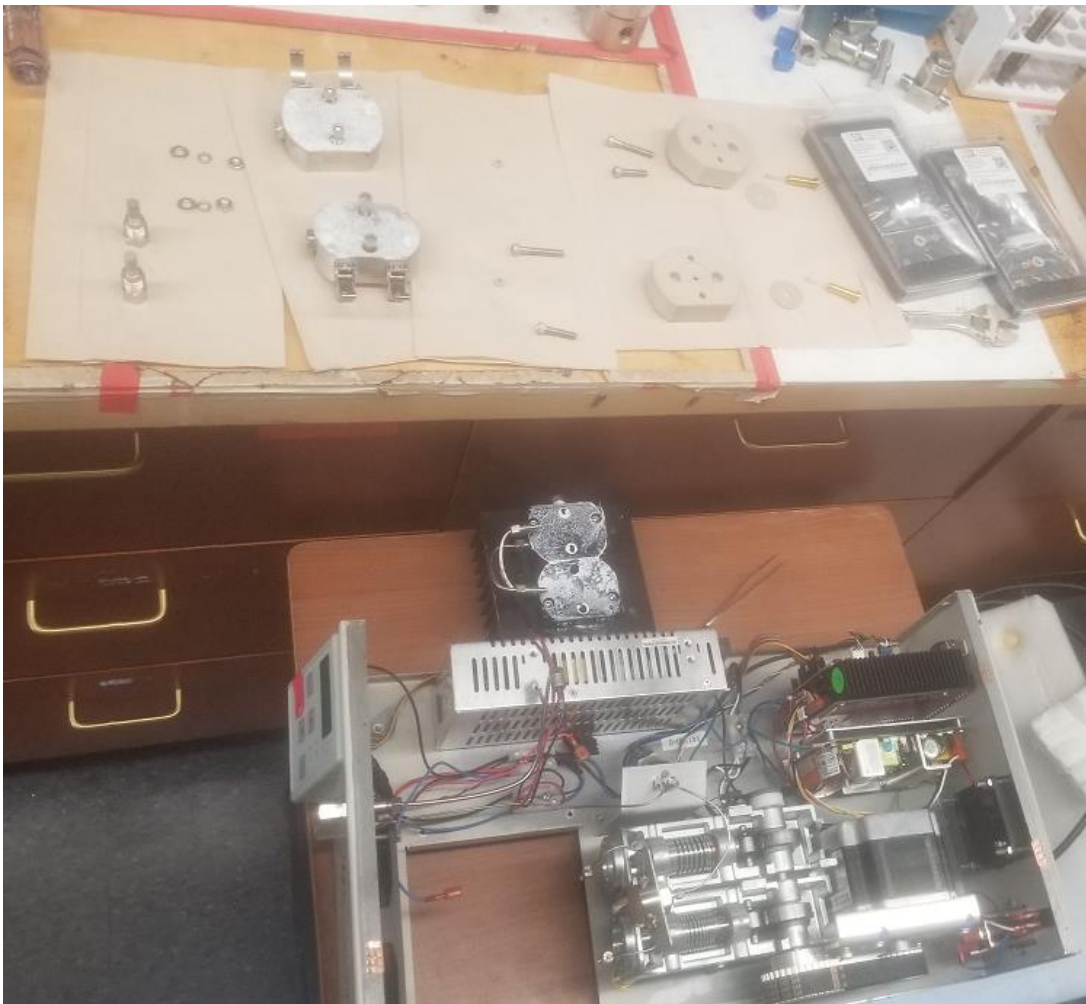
Photograph of the CO₂ pump seals, parts, and internal drive mechanism.
